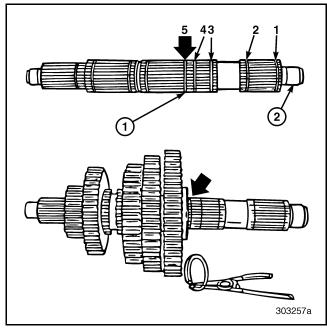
Installing Reverse Speed Gear Snap Ring onto Mainshaft (T313L/T318L Shown)
